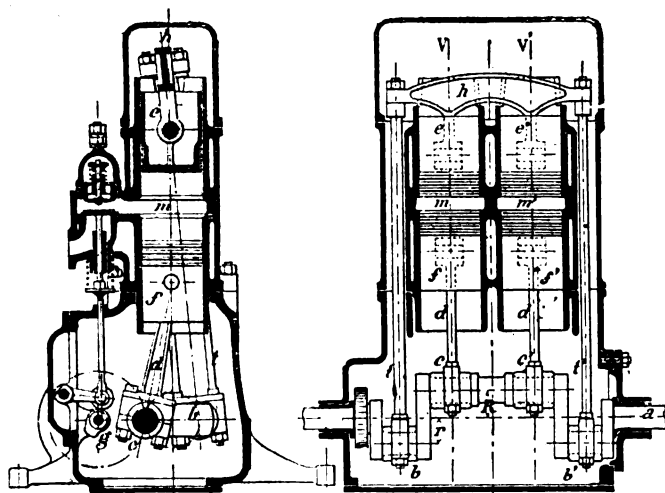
SECTIONAL ELEVATIONS OF GOBRON-BRILLIÉ MOTOR.
